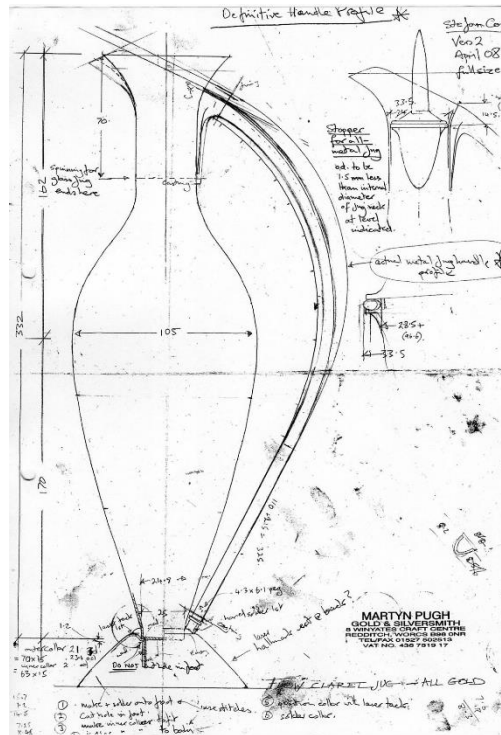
, Pugh's working drawing of claret jug, laser weld across the widest diameter of the jug's body.
